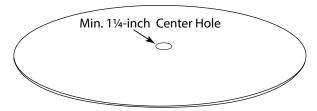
Minimum 1¹/₄ -inch center clearance hole in pan.
